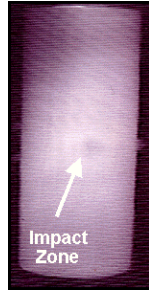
Infrared imaging of the 3 ft-lb impact damaged tube specimen
